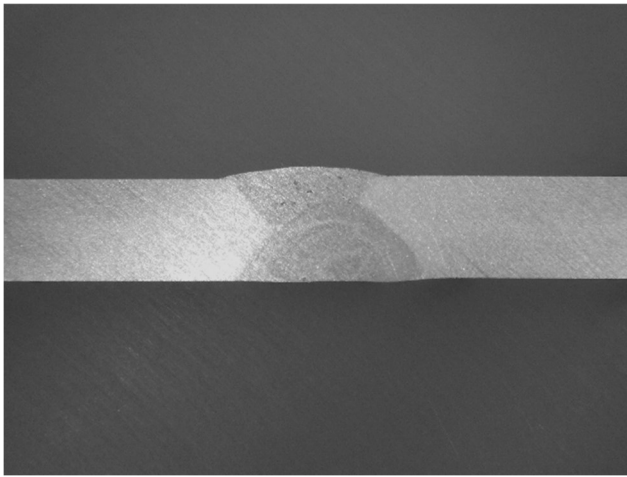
5052-H32 aluminum plate welded with ER4043 rod. Ground to 600 grit finish then etched with AWS D1.2 Basic Etchant.
